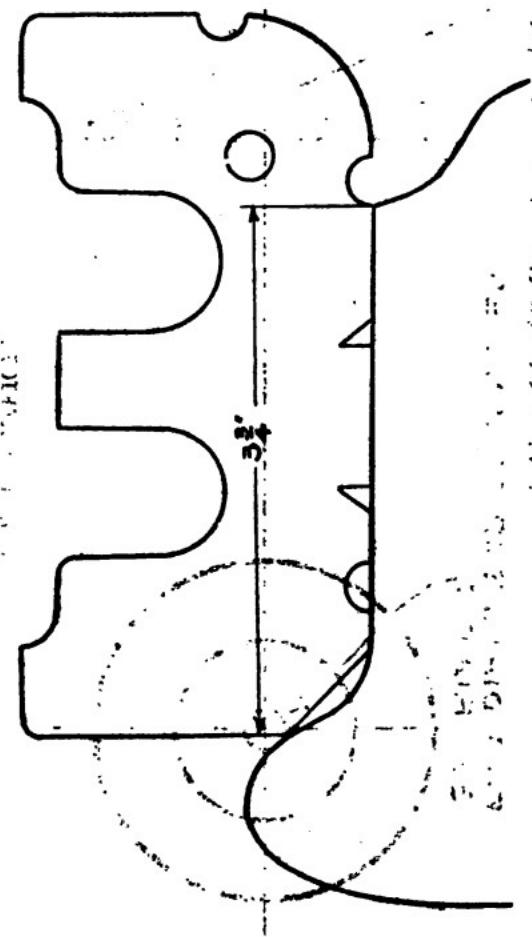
METHOD OF GAUGING BROKEN RIMS.
